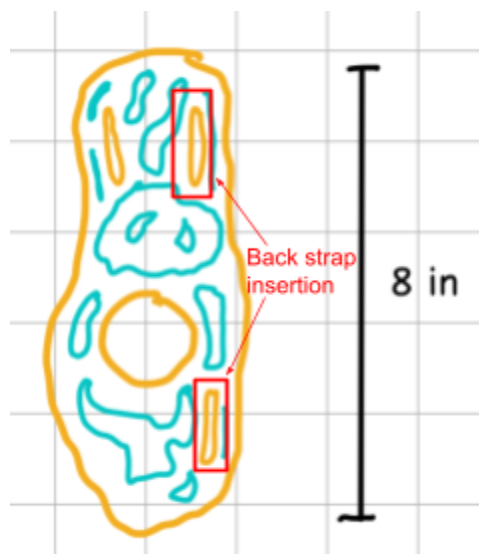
A drawing showing where the back straps should be inserted through the PLA-CF pieces.
